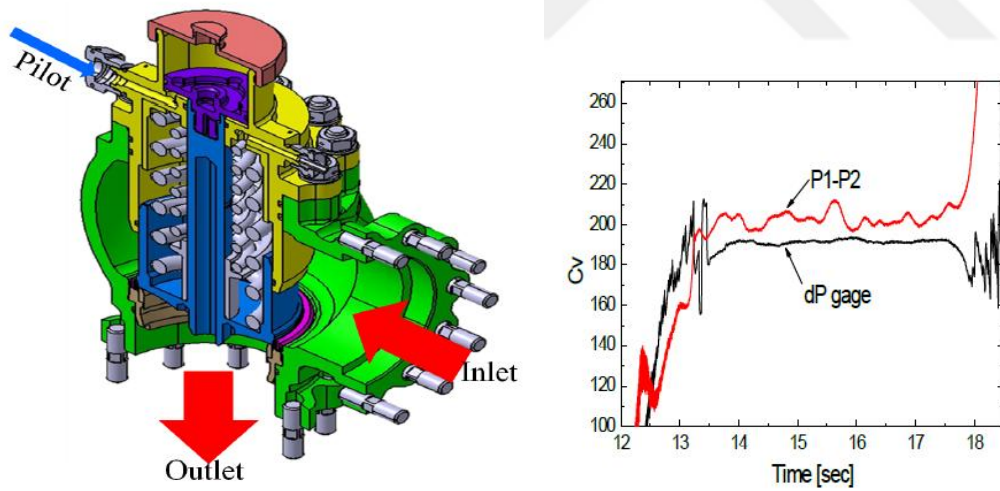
Thrust Chamber Fuel Valve Design and Valve Coefficient Test [45]
